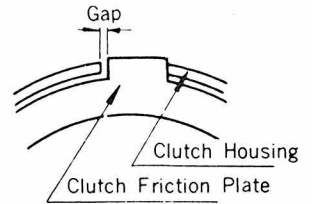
Gap between clutch housing (3—Fig. K1-12) and friction plates (7) should be (0.0016-0.012 in.).
